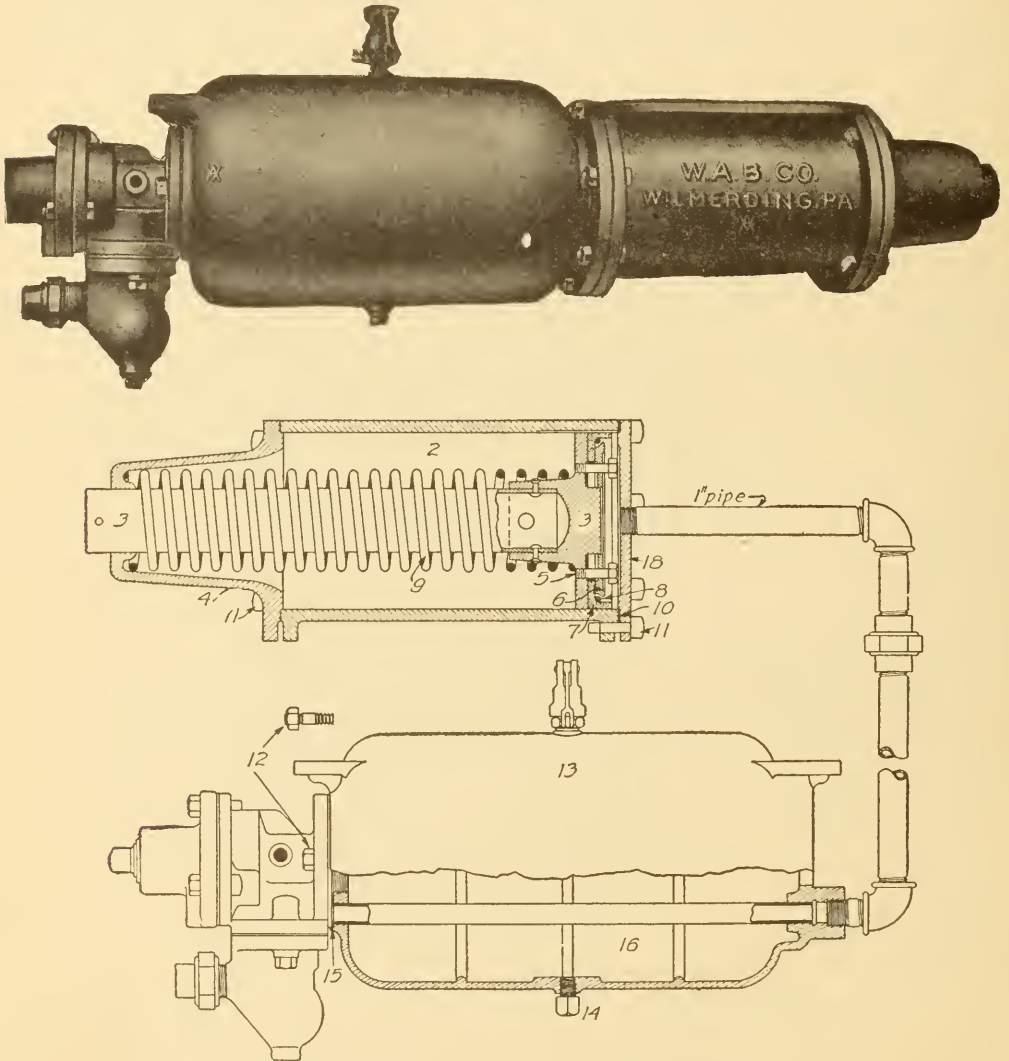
Westinghouse Type "KC" Combined Freight Brake Equipment (Upper) and Type "KD" Detached Freight Brake Equipment (Lower)
